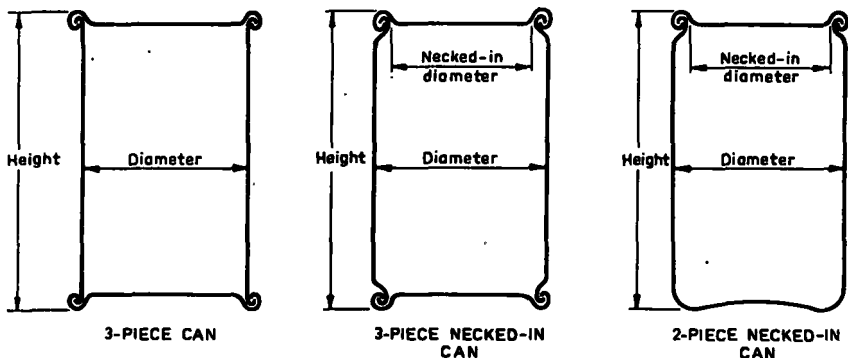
MEASUREMENT OF CAN DIMENSIONS
